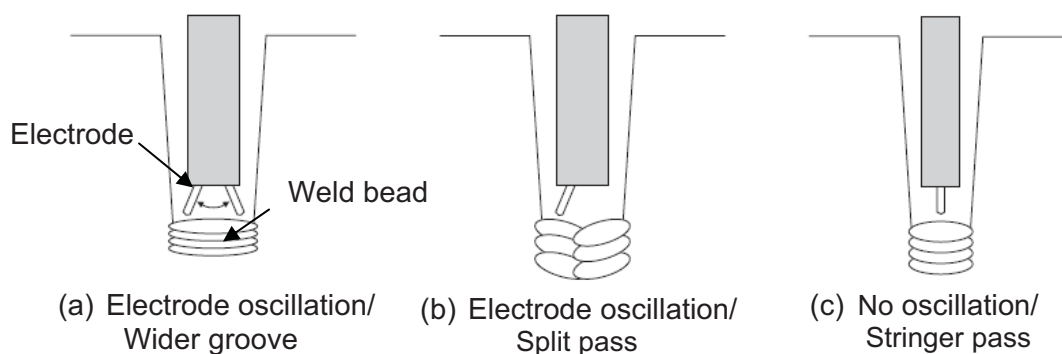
Manipulate modes of welding electrode and weld pass in NG-GTAW [48].
